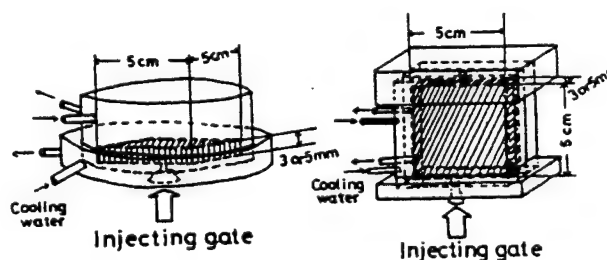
Process to prepared Al₂O₃ ceramics by low pressure injection molding method. Fig. 5 Illustration of the two kinds of metal molds used.
